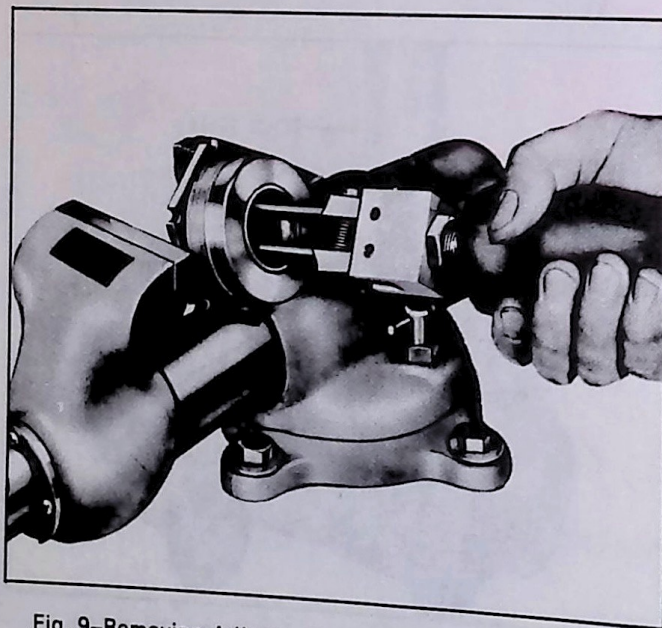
Removing Adjuster Plug Bearing Race Using Tools J-5822 and J-2619
